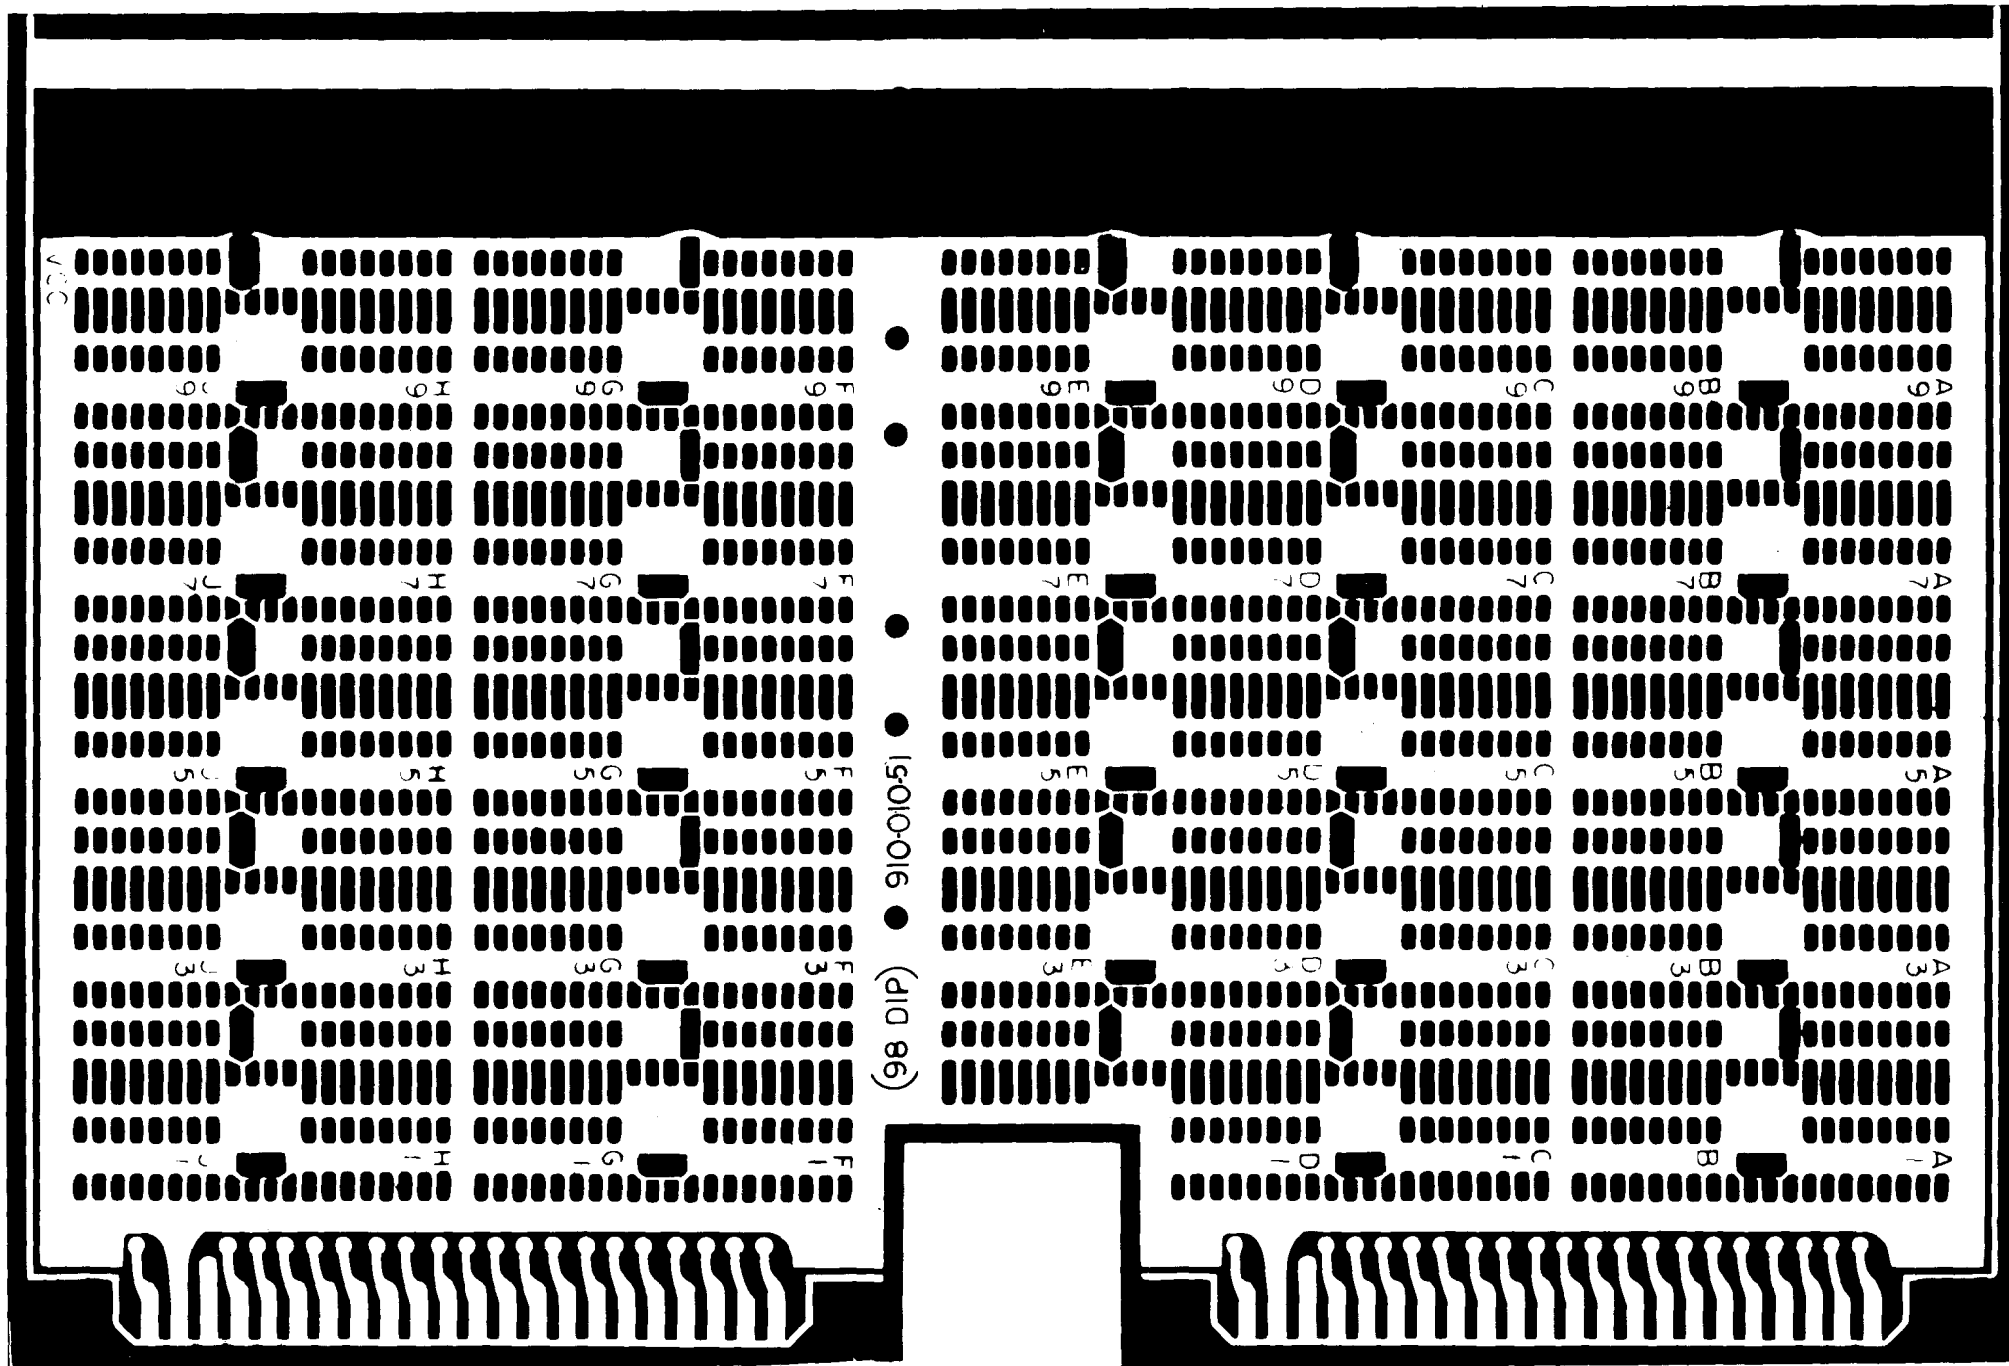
98 DIP Socket PC Card, Artwork, Component Side
